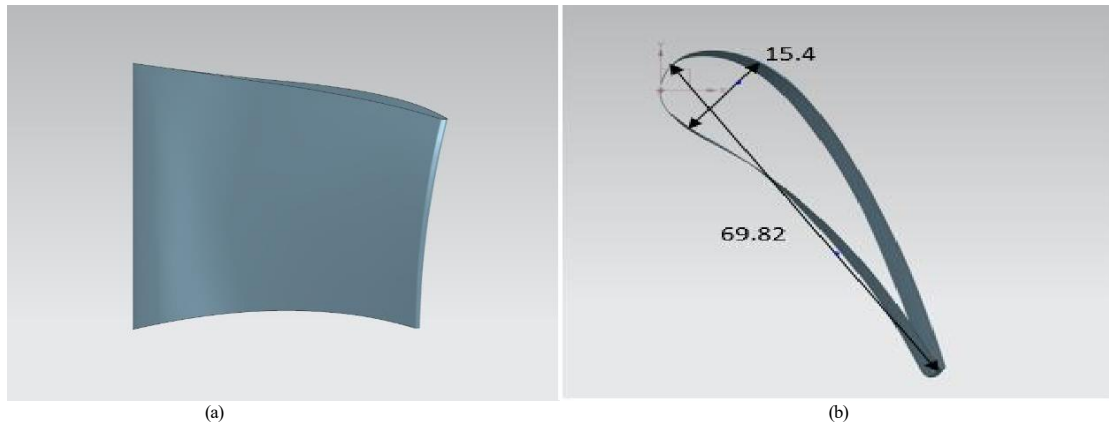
Gas turbine stator blade geometry: (a) front view (b) top view.
